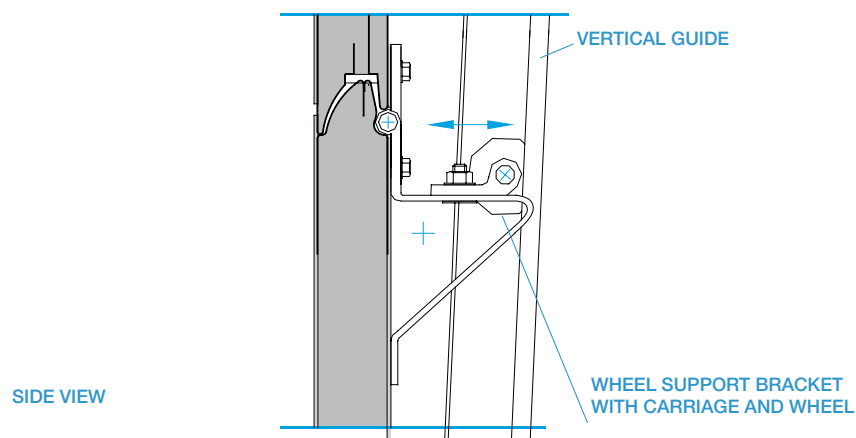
WHEELS SUPPORT ASSEMBLY - ALL TYPES
